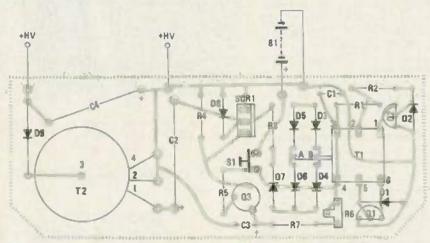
IF YOU CHOOSE TO use a PC board, this parts-placement diagram should be followed.
